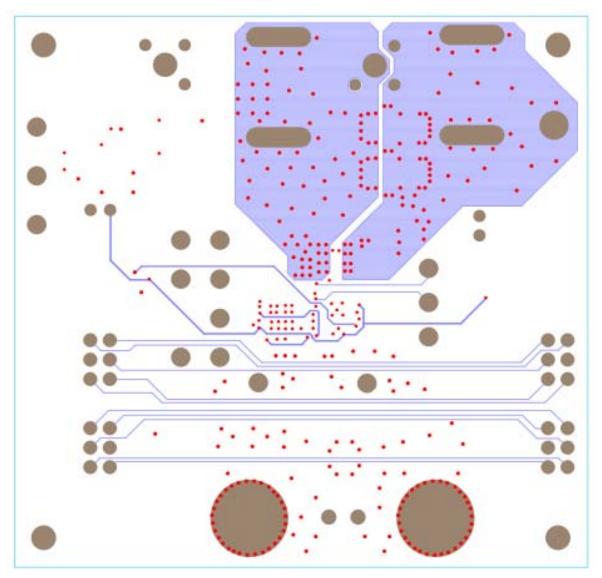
PCB - INNER LAYER 3 (TOP VIEW)
